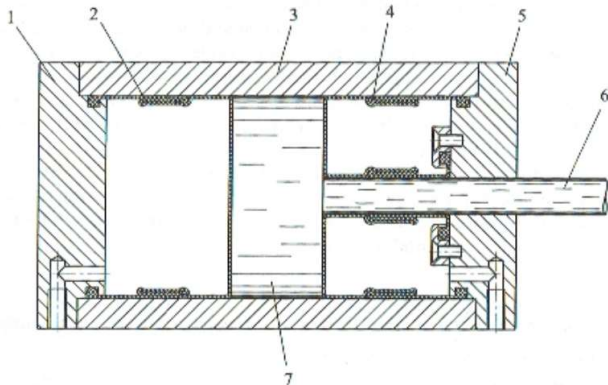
Schematic drawing of flexible chamber piston (Taken from [27])
